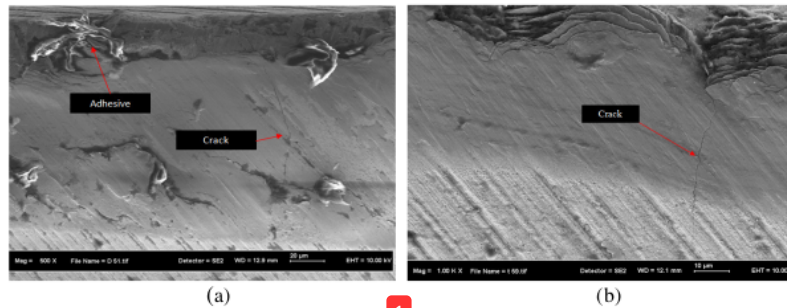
(a-b): Adhesive and cracks on the flank face of the uncoated tool at cutting speed of 155 and 140 m/min
